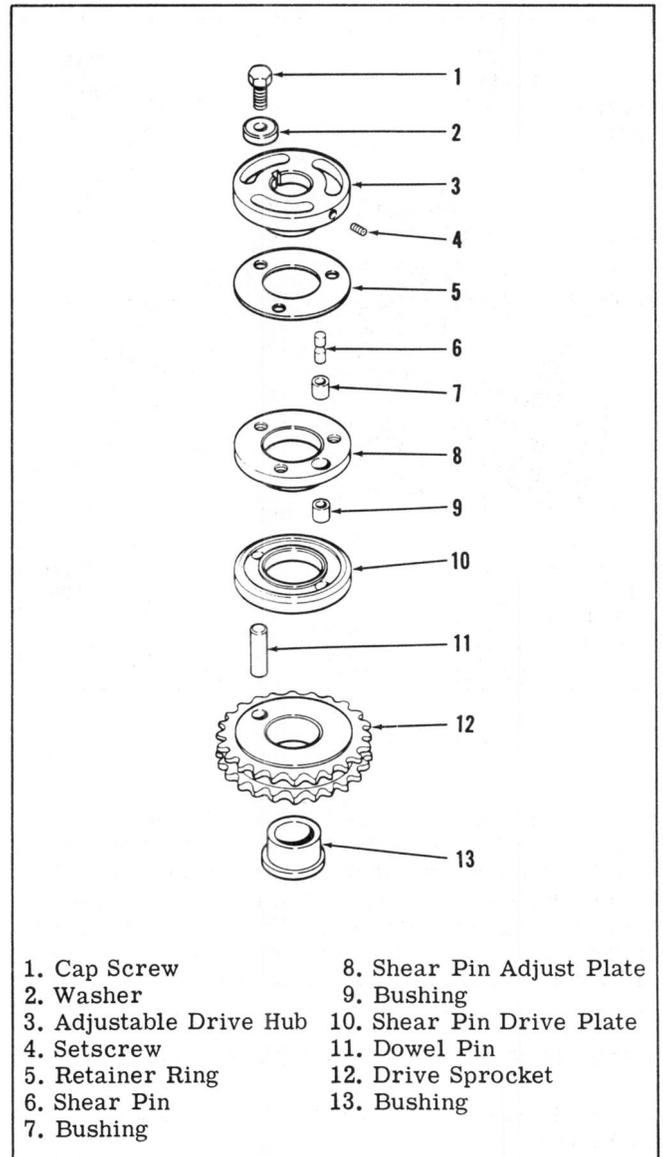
Replacing Conveyor Drive Sprocket Shear Pin
